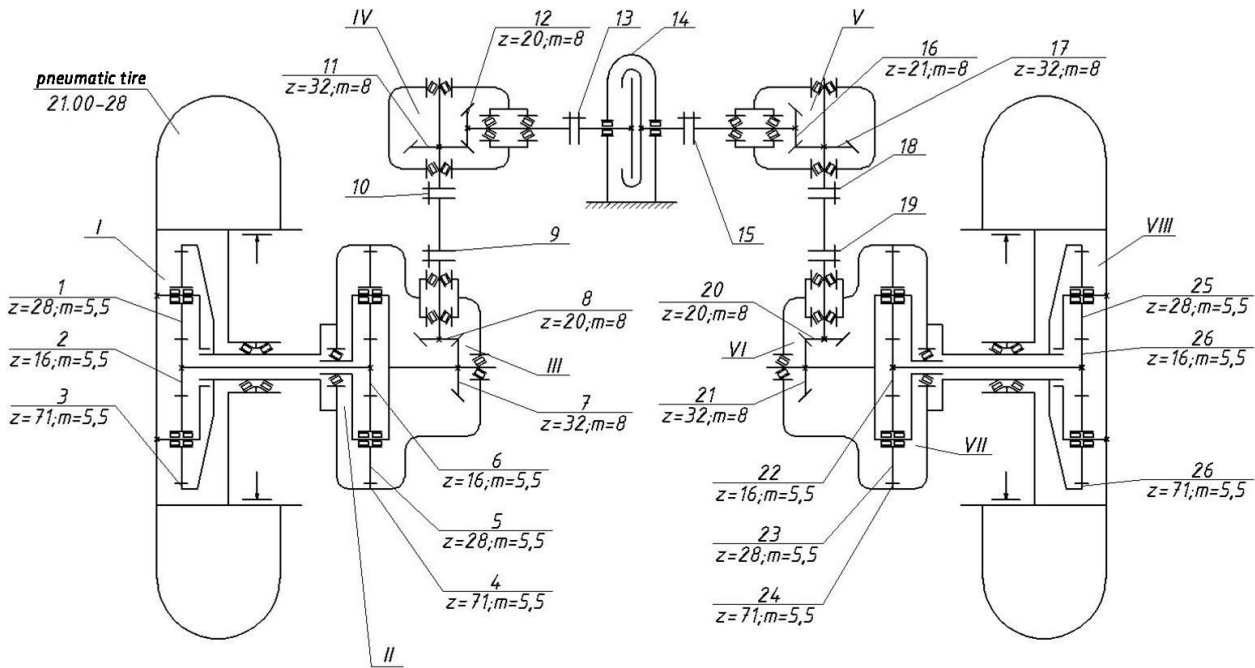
Transmission kinematic diagram of the dynamometric laboratory: I, VII – wheel planetary gearboxes; II, VII – additional planetary gearboxes; III, IV, VI – bevel gearboxes ($z_1 = 20$, $z_2 = 32$, $m = 8$); V – bevel gearbox ($z_1 = 21$, $z_2 = 32$, $m = 8$); 1, 5, 23, 25 – satellites of planetary gearboxes; 2, 6, 22, 26 – drive pinions of planetary gearboxes; 3, 4, 24, 26 – driven gears of planetary gearboxes; 7, 11, 17, 21 – driven gears of bevel gearboxes; 8, 12, 16, 20 – drive pinions of bevel gearboxes; 9, 10, 13, 15, 18, 19 – rigid flange couplings; 14 – inductor slip coupling
